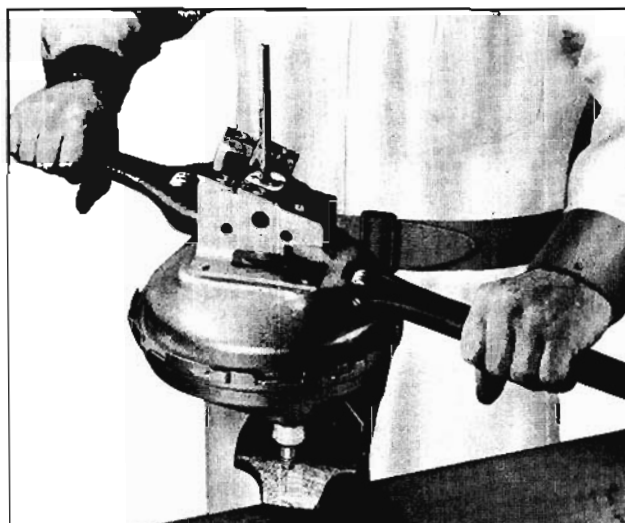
Separating Housings (30, 31 & 32 Series)
